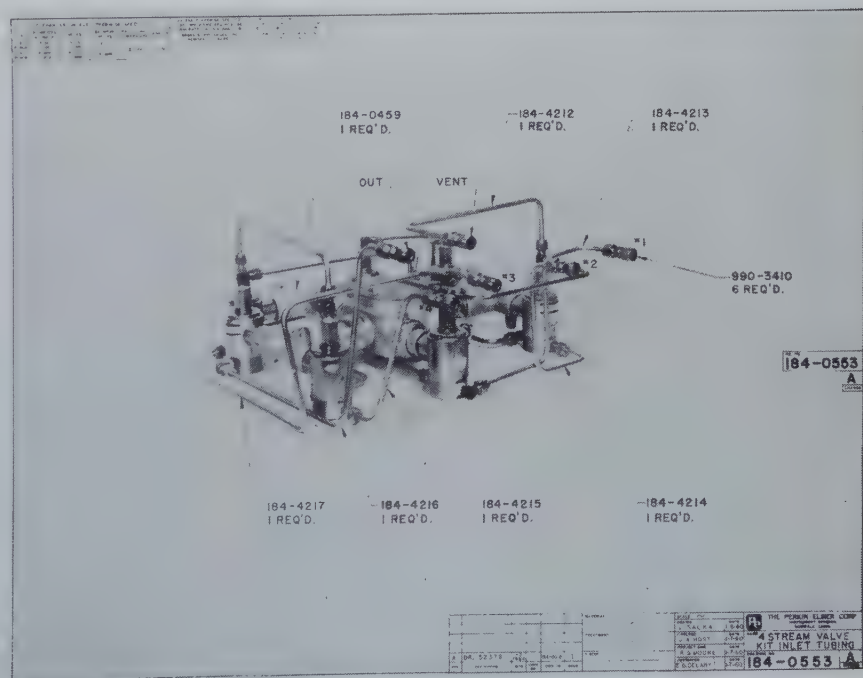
Drawing of a valve manifold sub-assembly in which photographic techniques provide optimum readability at minimum drafting expense.
